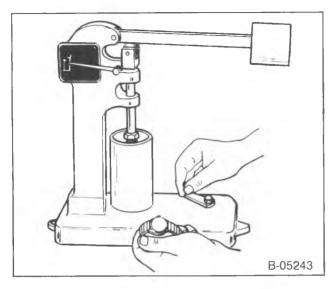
Testing the Hydraulic Lifter — Flat Type Only
